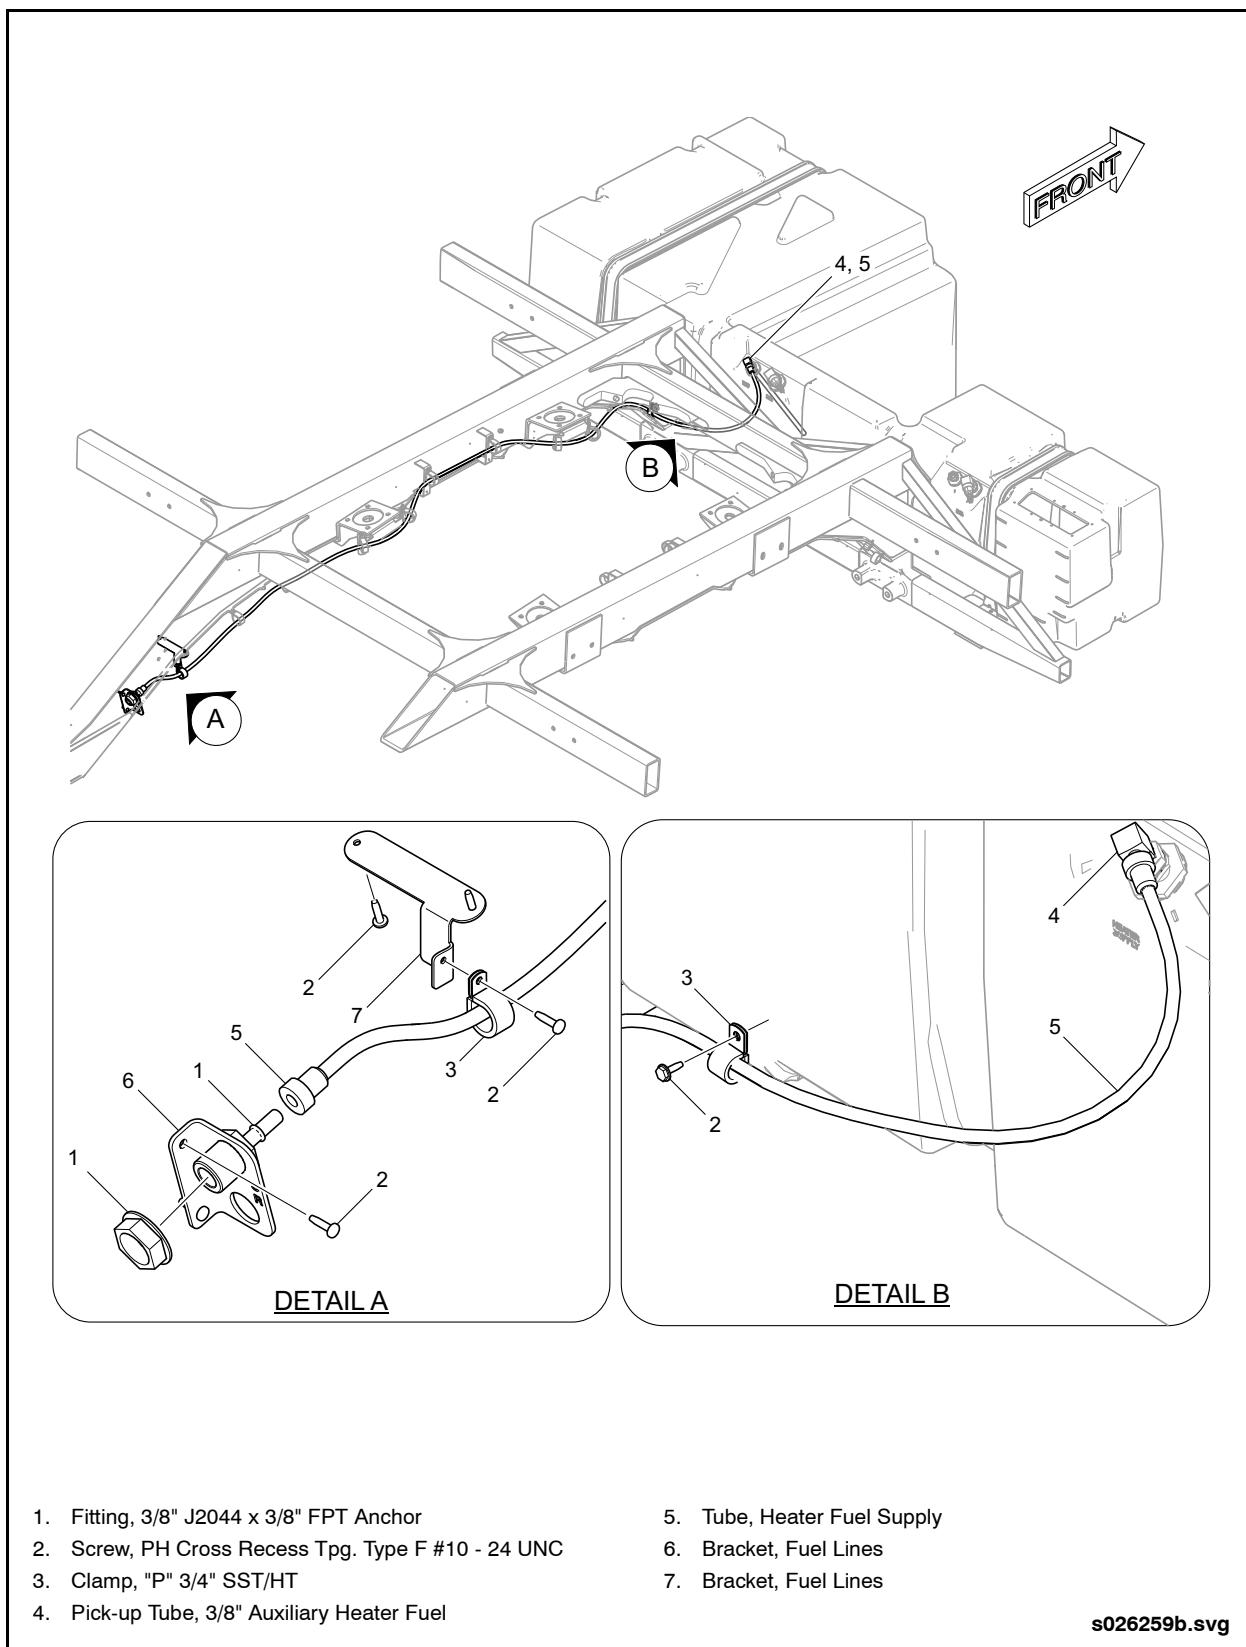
Auxiliary Coolant Heater Fuel Line Installation
